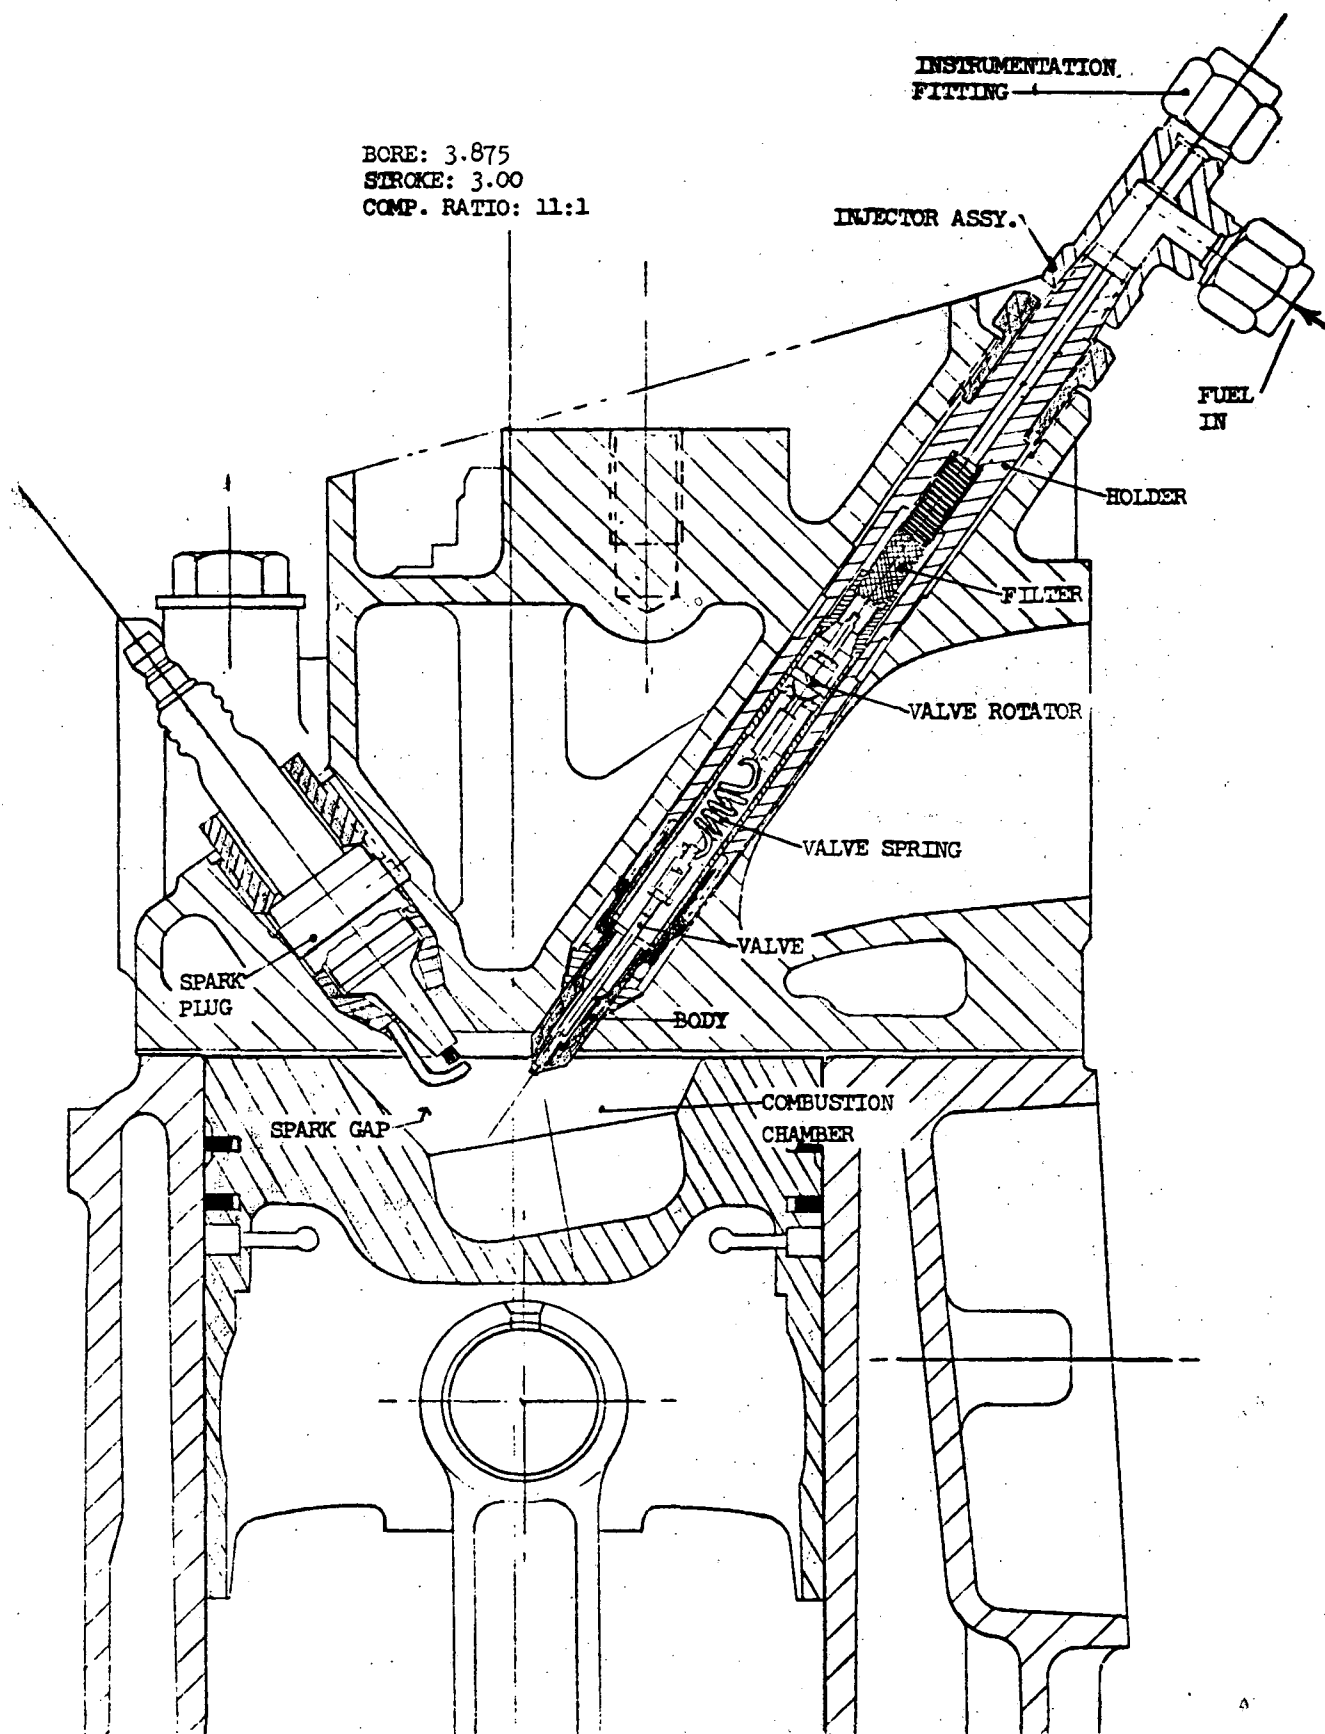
Cross Section of 141 CID PROCO Engine Head and Piston Assembly
